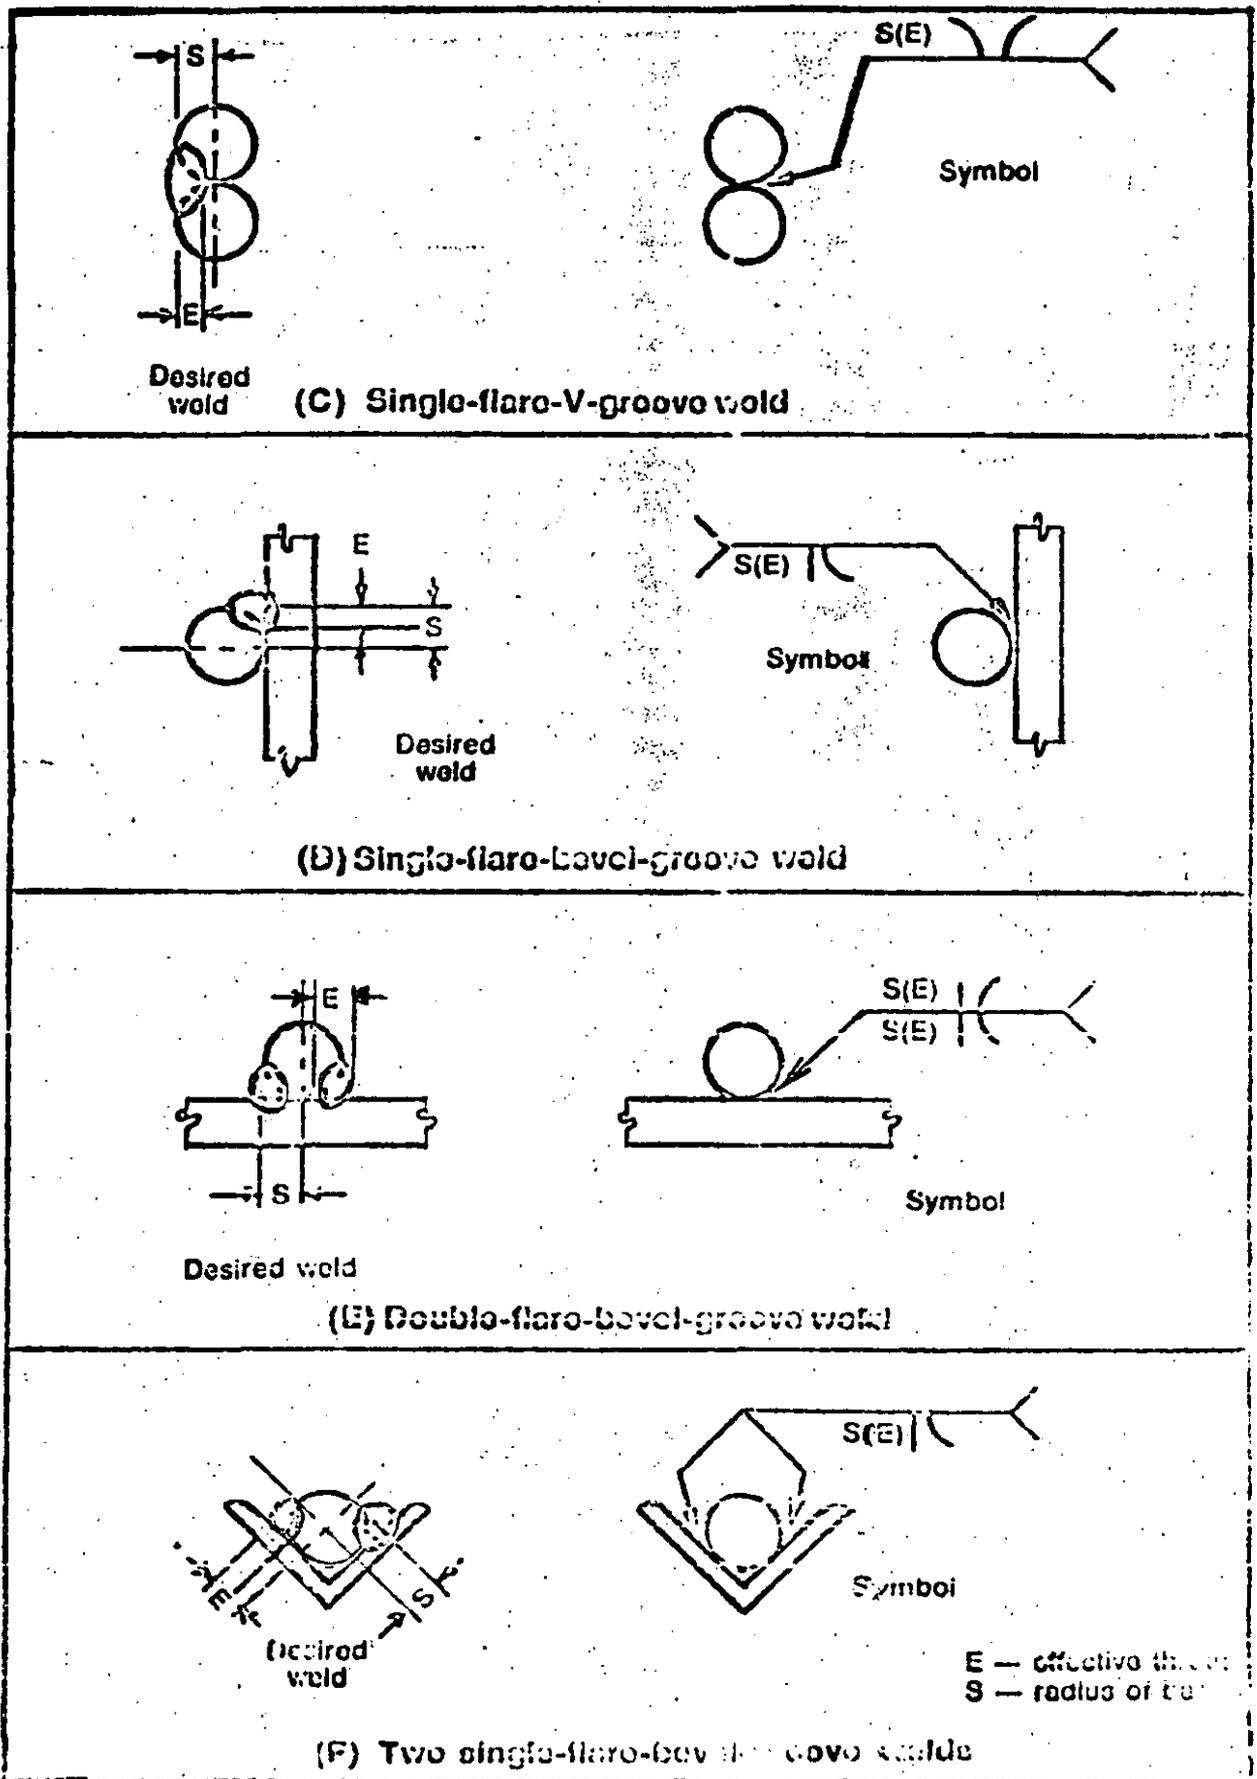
(cont.) — application of flare-bevel- and flare-V-groove weld symbols
